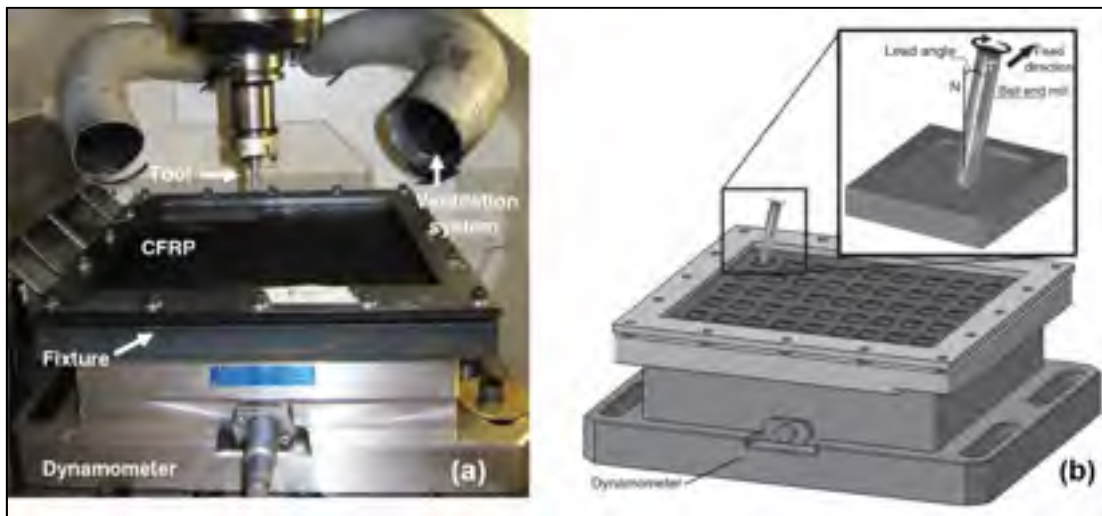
CFRP milling, a) experimental setup, b) tool lead angle
